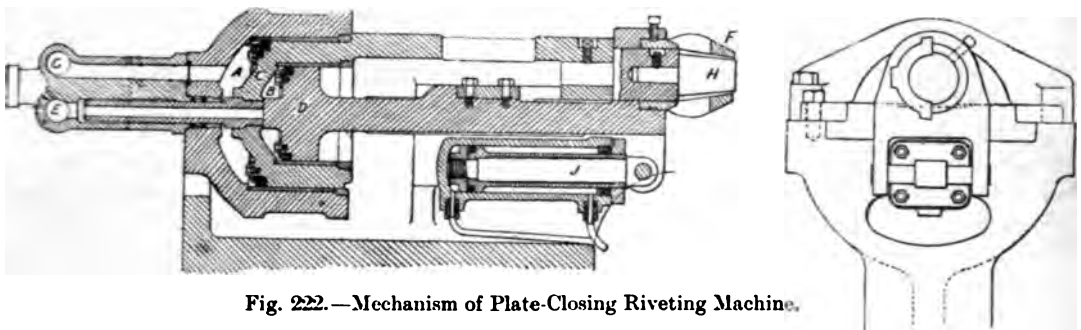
Mechanism of Plate-Closing Riveting Machine.
